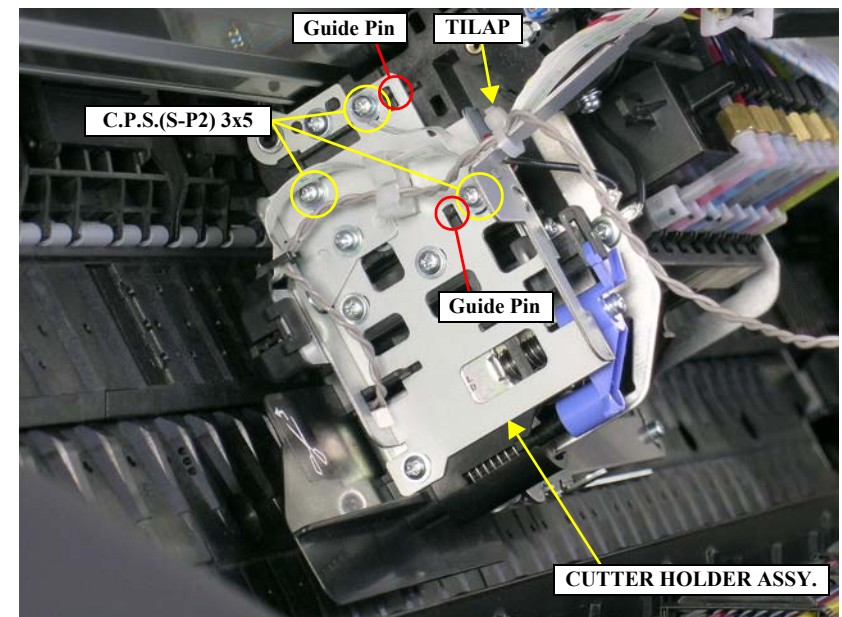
Removing the CUTTER HOLDER ASSY.
